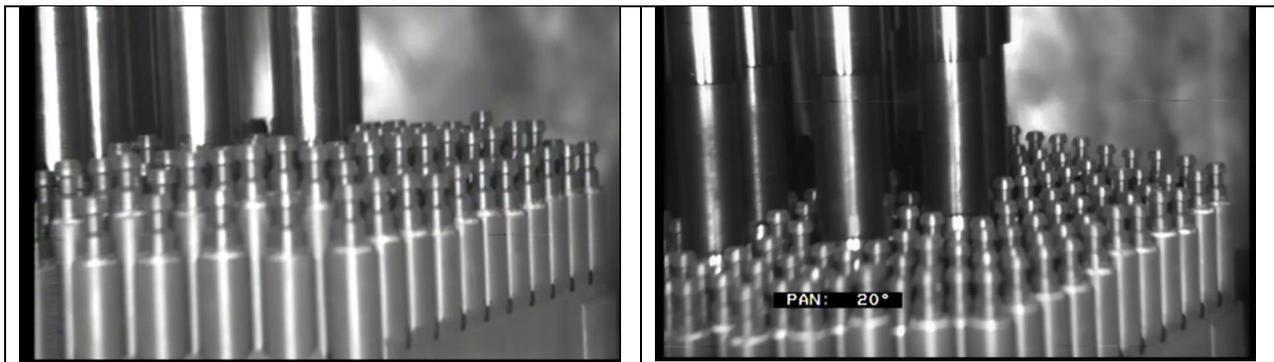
View of the top end plugs of fuel assembly A (left) and B (right).
